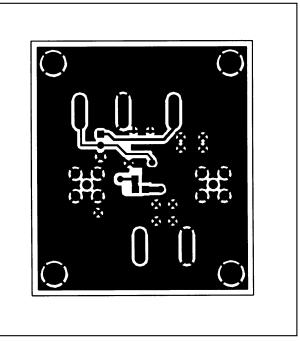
MAX4278 EV Kit Board Layout—Solder Side
